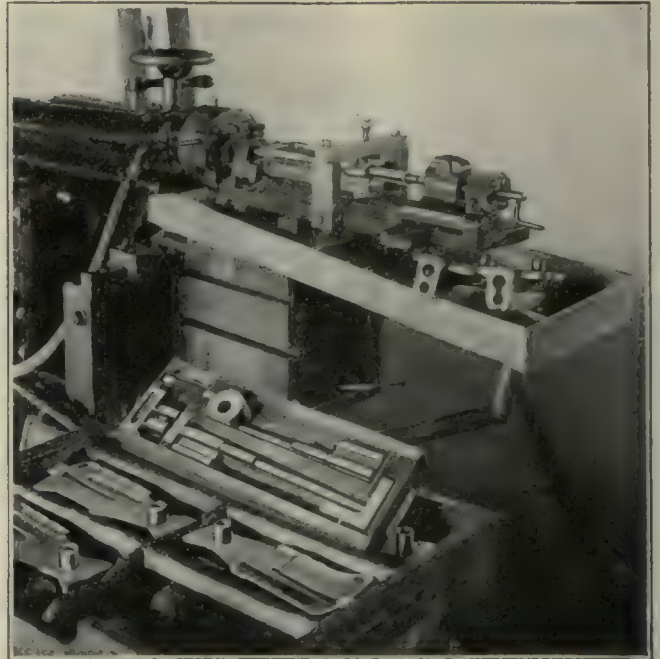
SHAVING FIXTURE FOR CLEARANCE SLOTS FOR BOLT-LOCKING LUG
